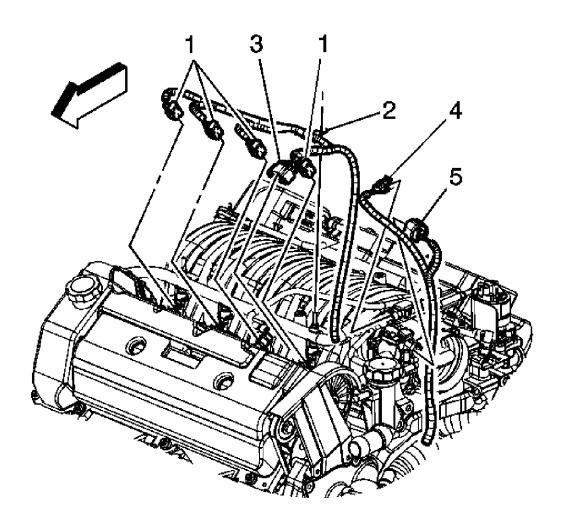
Identifying Engine Harness Electrical Connectors Courtesy of GENERAL MOTORS CORP.
